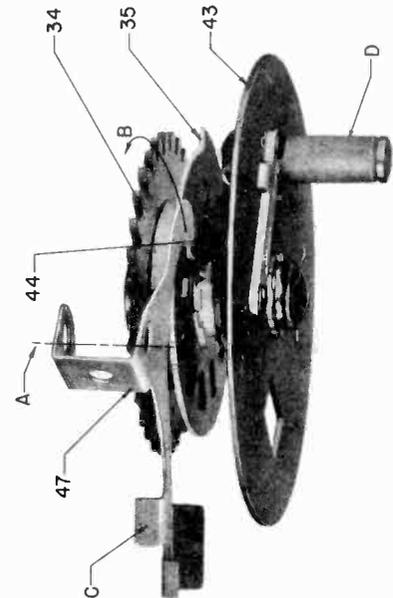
Clutch Assembly with Pawl (44) Disengaged
